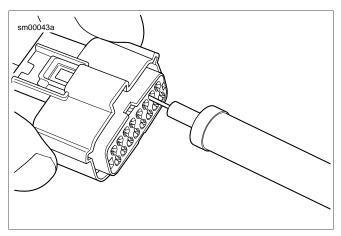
Molex MX 150 Sealed Connector: Terminal Remover (HD-48114)
